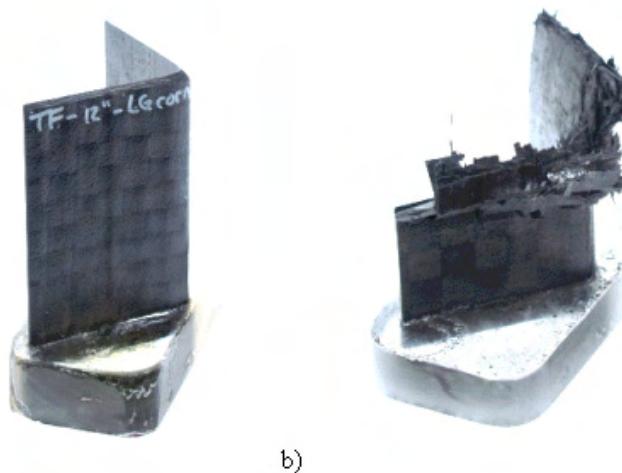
a, b. Large corner element, specimen V, before and after crush testing.
